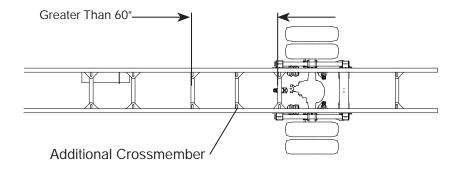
Crossmember Added When Distance Exceeds 60 Inches (1524 mm)
